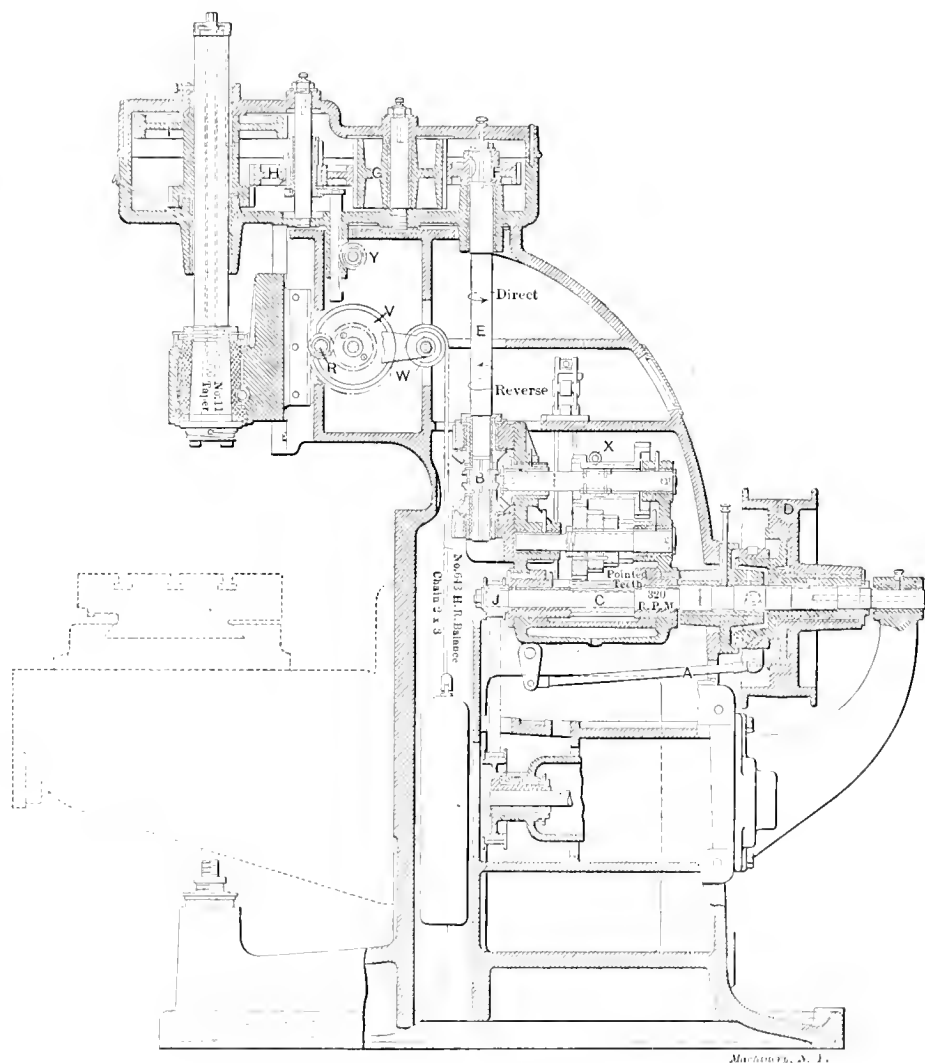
Vertical Section through Spindle-head and Column, showing Spindle Driving Mechanism.
